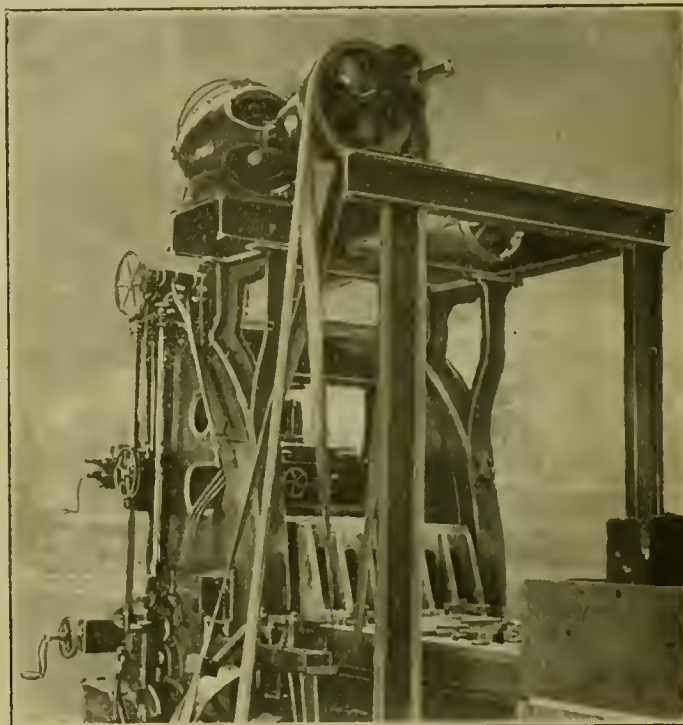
REAR VIEW OF THE MOTOR-DRIVEN PUTNAM PLANER, SHOWING STRUCTURAL SUPPORT FOR DRIVE.—MILWAUKEE MOTOR.
